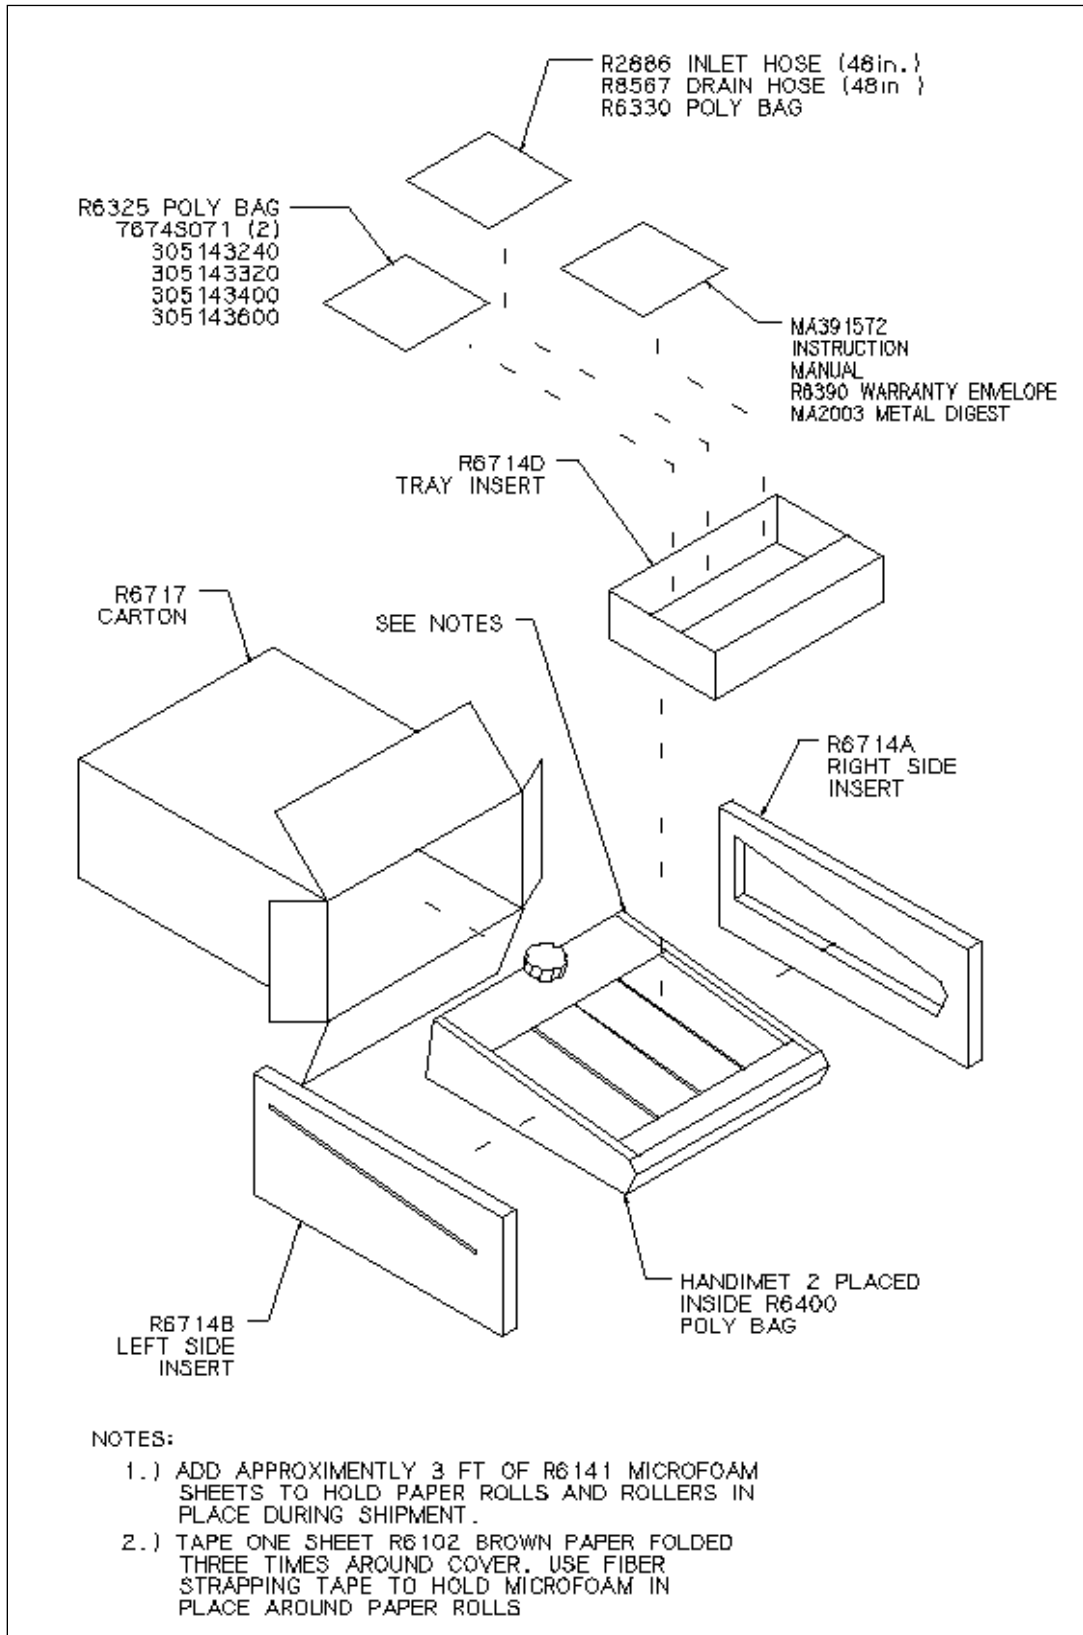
HandiMet 2 Packaging Diagram (391572D)
